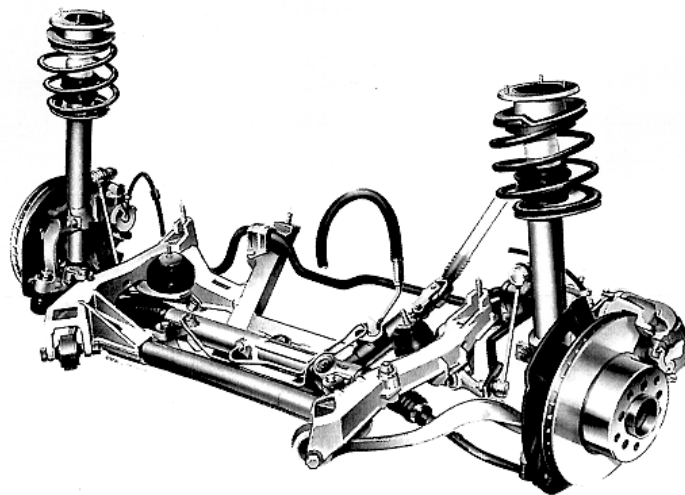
Double-jointed strut-type front axle with ideal steering axis (BMW 5, 1996)
